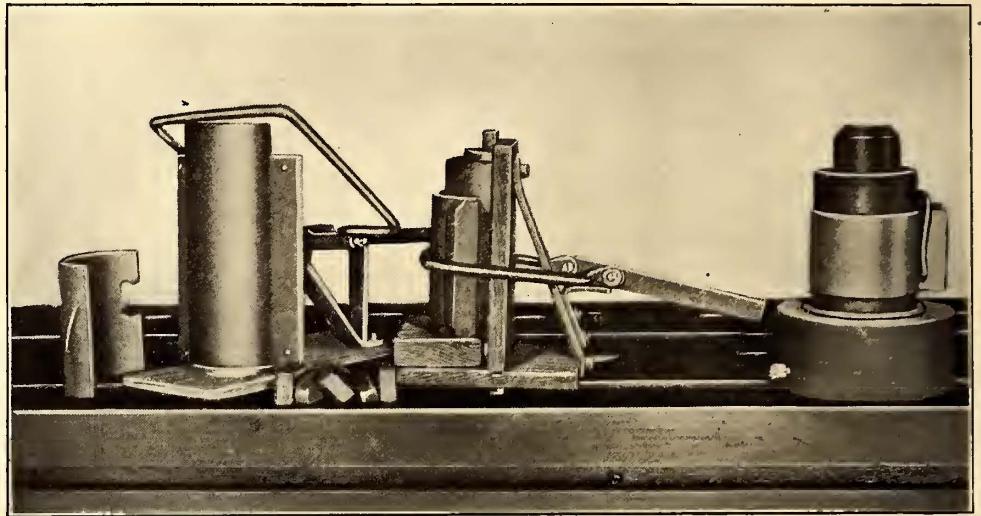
DEVICE FOR BABBITTING BEARINGS
